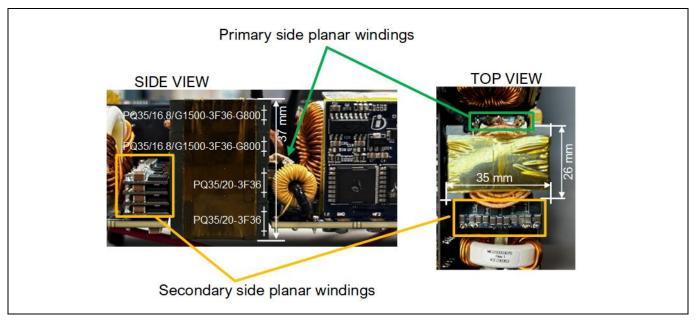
Integrated planar transformer assembly – picture of an assembled prototype
